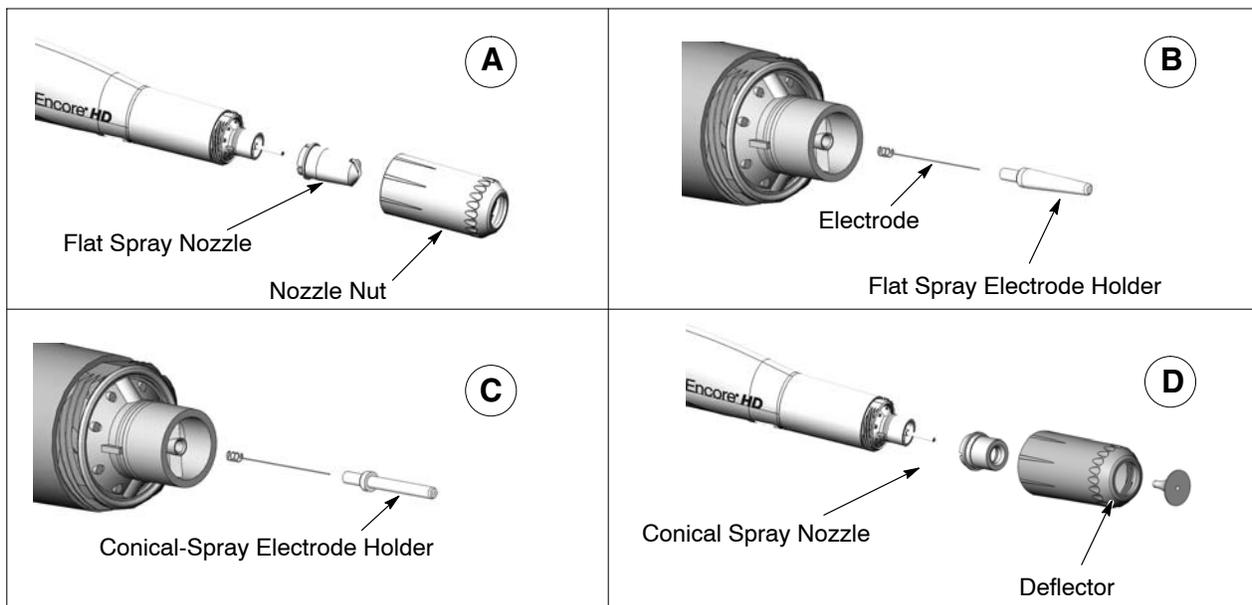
Converting from a Flat Spray Nozzle to a Conical Spray Nozzle
